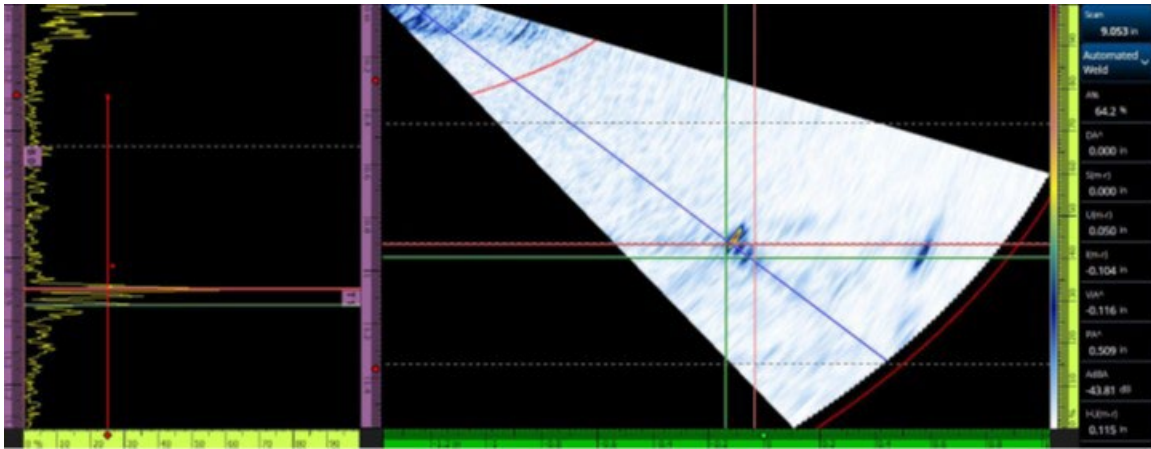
PAUT indication of defect at Location C in fillet weld test panel MGL-10 from OD-raster scan
